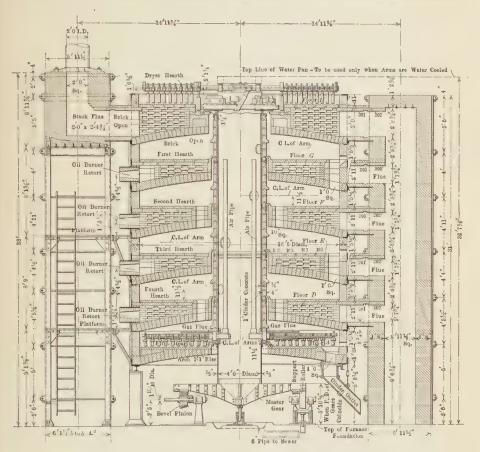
Wedge five-hearth mechanical down-draft muffle roasting furnace.
